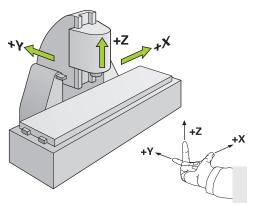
Assignment of the rectangular coordinate system to the machine axes
